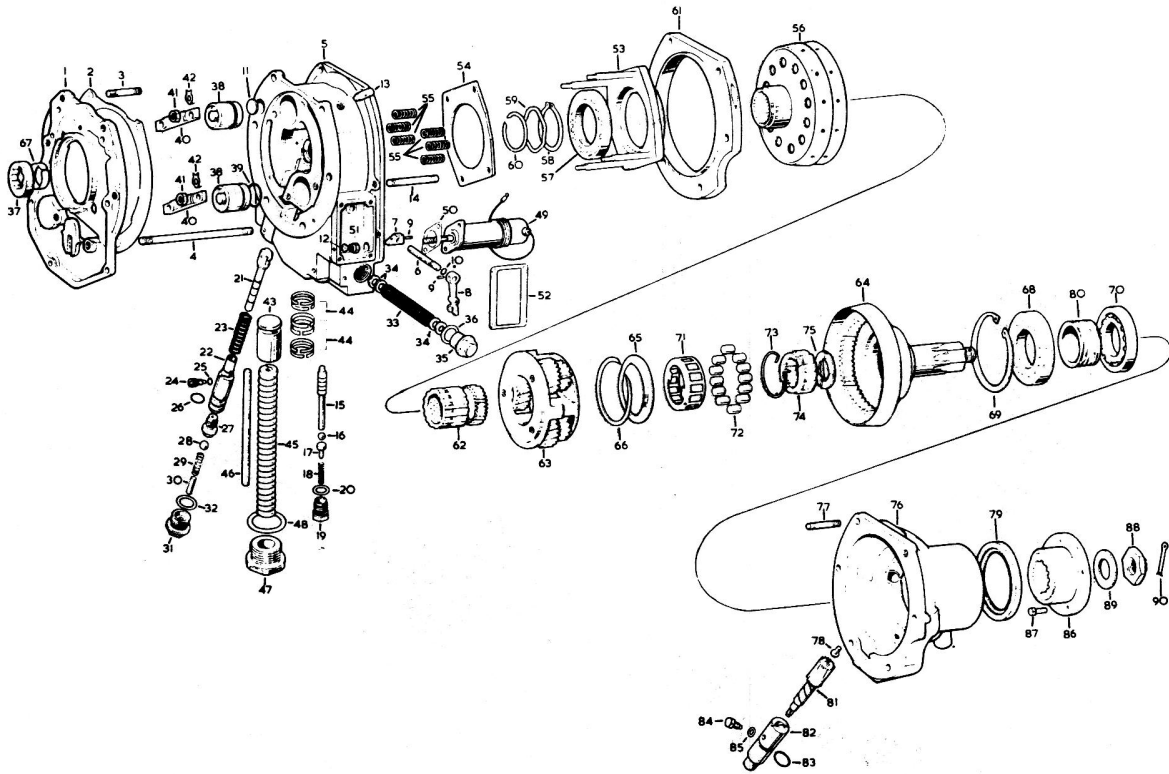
THE 'A' TYPE COMPACT OVERDRIVE UNIT
